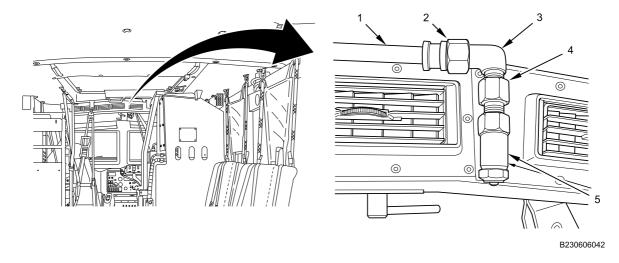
Front FSS Cabin/Crew Dispersion Unit and Pipe.
